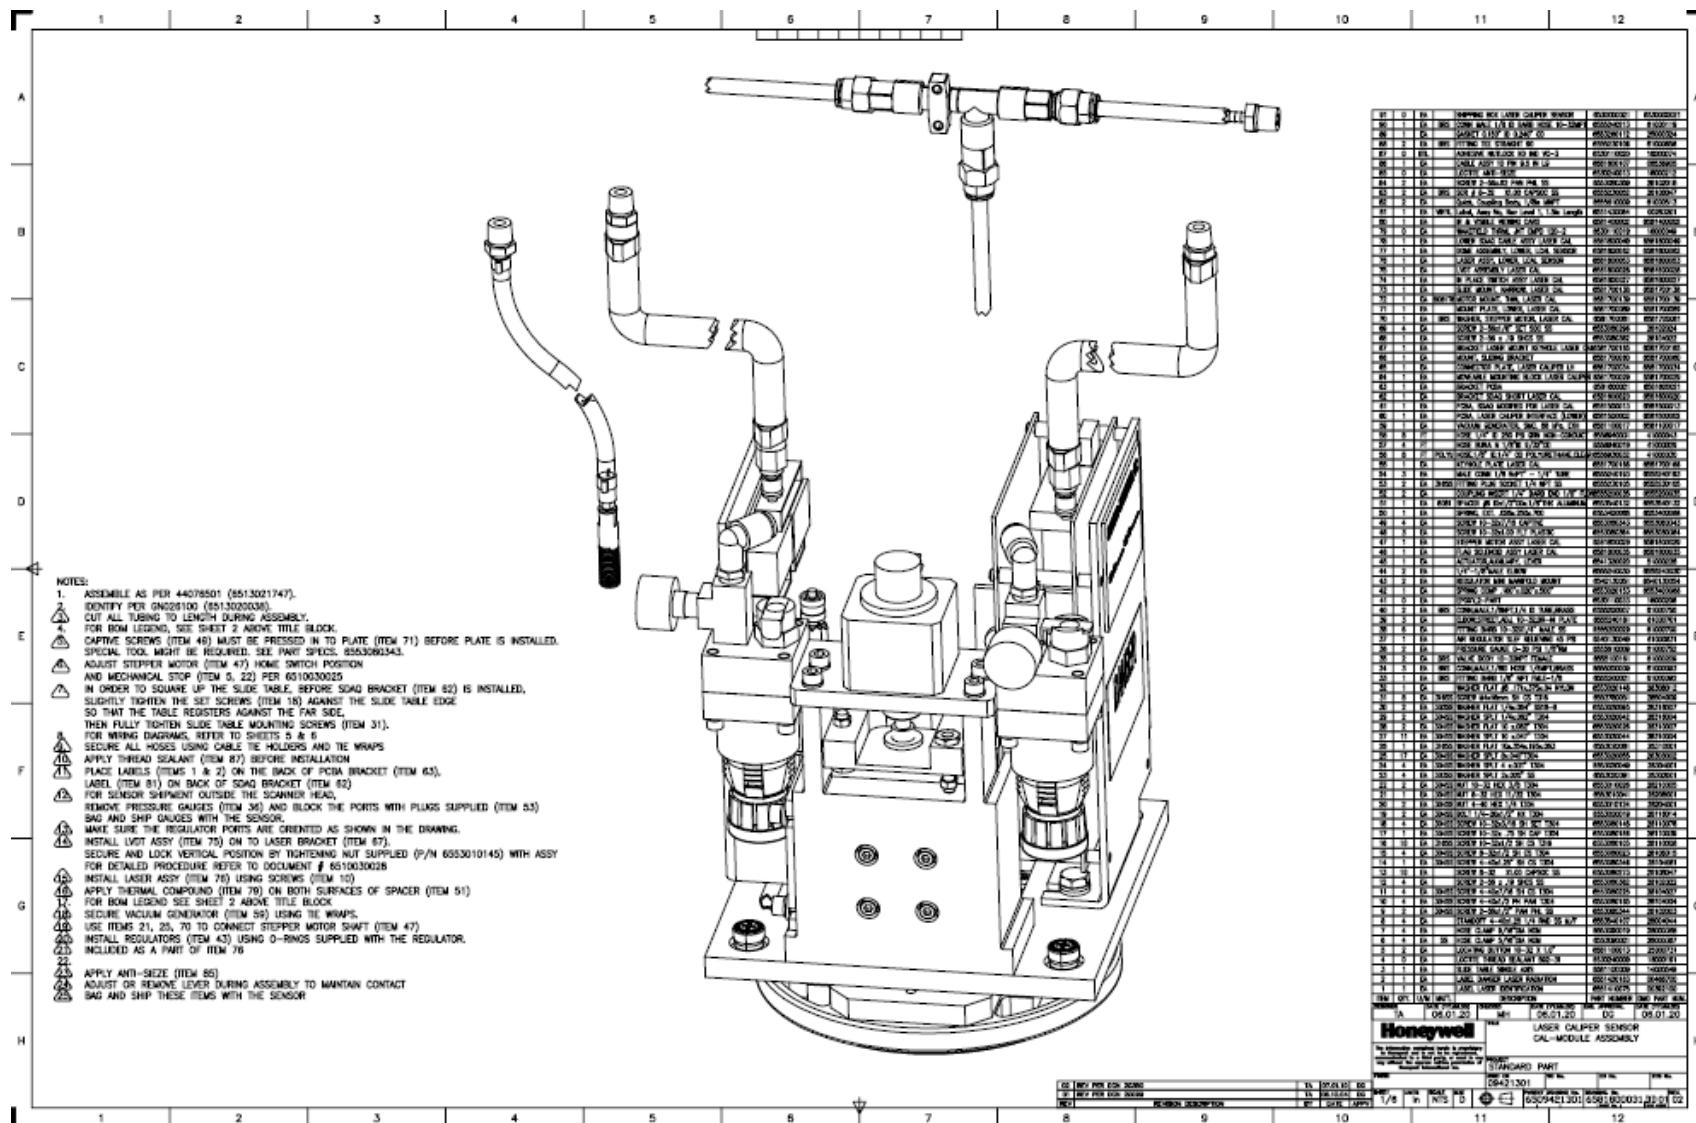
6509421301: laser caliper sensor top-level assembly
